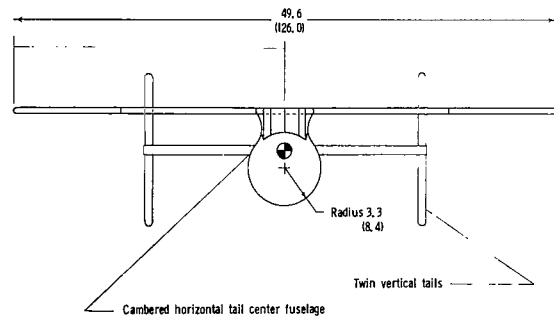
Drawing of model with rotor/wing 8. Dimensions in inches (cm).
